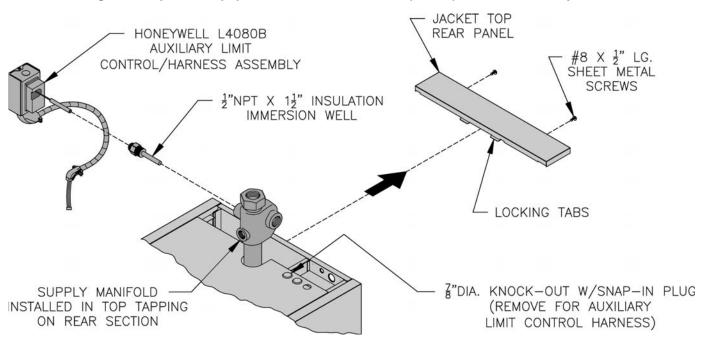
Optional Equipment - Auxiliary Limit Control Assembly Details
